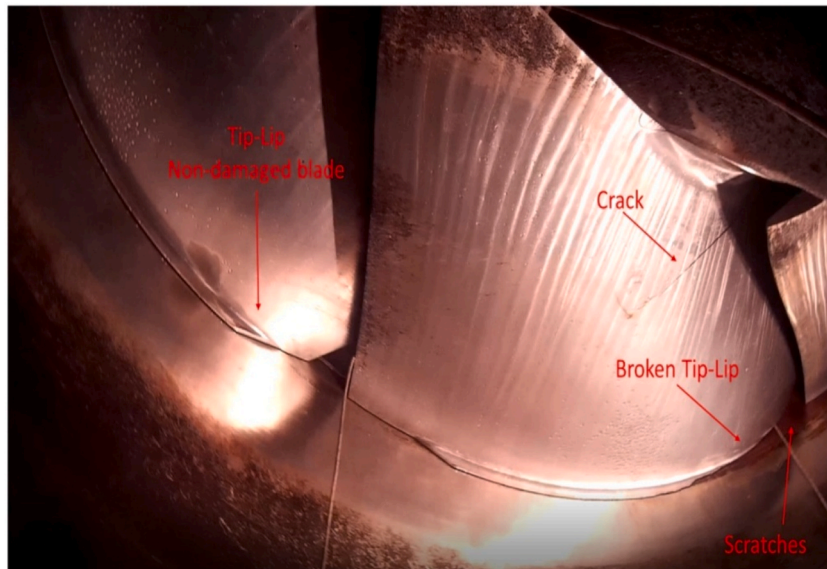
Cavitation pitting damage on a Kaplan turbines surface [29].
